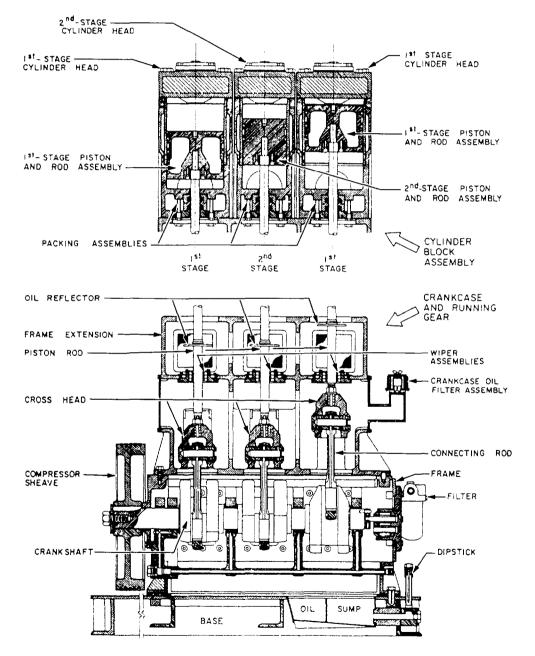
LPAC, cross-sectional views (reciprocating type.)
